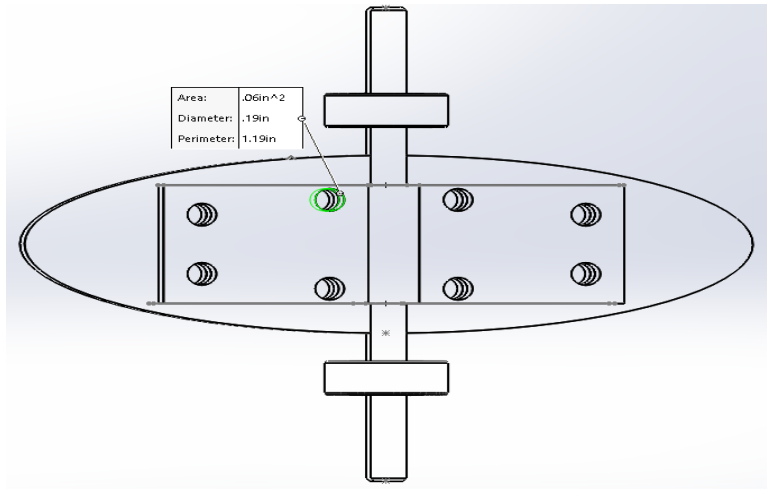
Dimensions of the holes on the plastic plate and ellipses
